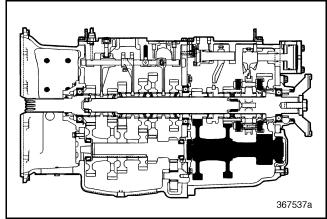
Rear Countershaft Component Locator (T313L/T318L Shown)
